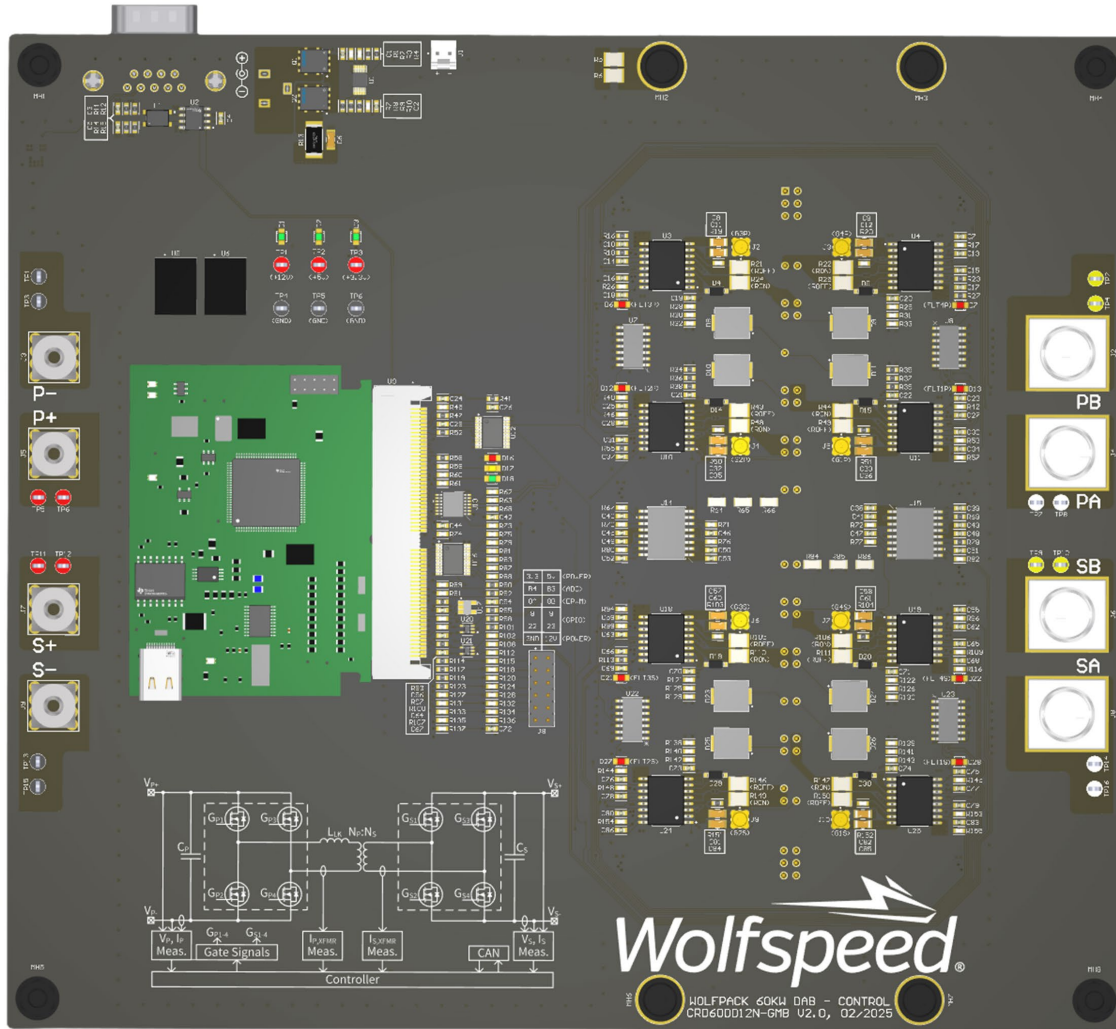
CRD60DD12N-GMB full assembly rendering - top view
